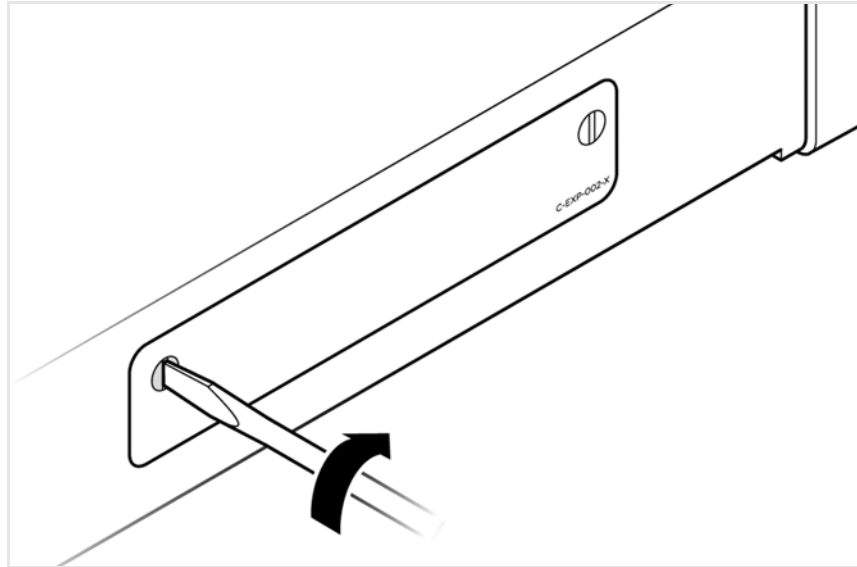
Replace Retaining Screws in Blank Panel and Tighten
